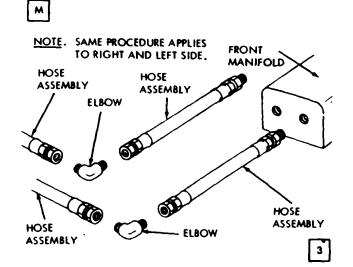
Removal or installation of hydraulic hose, lines, tubes, fittings and valves (sheet 4 of 5).
